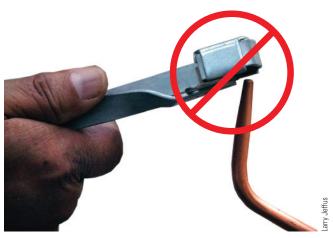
Sparklighter held too close over the end of the tip.
